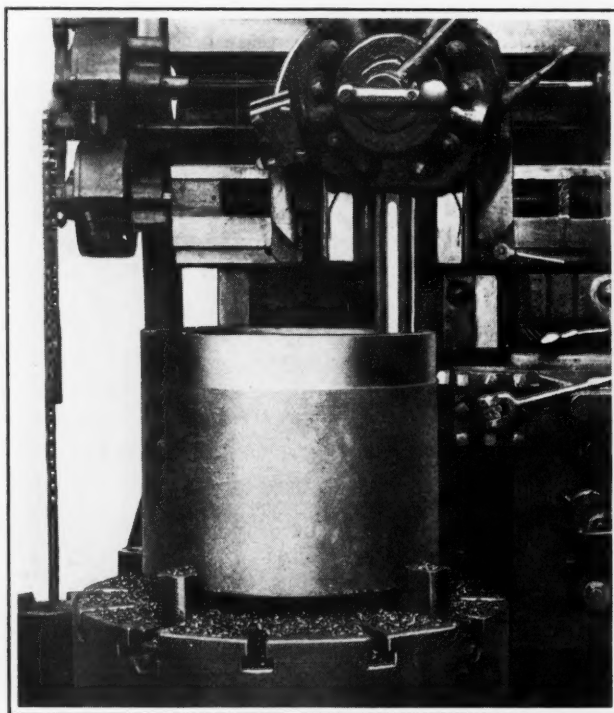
Solid Rings with a Groove on One Side are Cut from Large Cylindrical Castings
